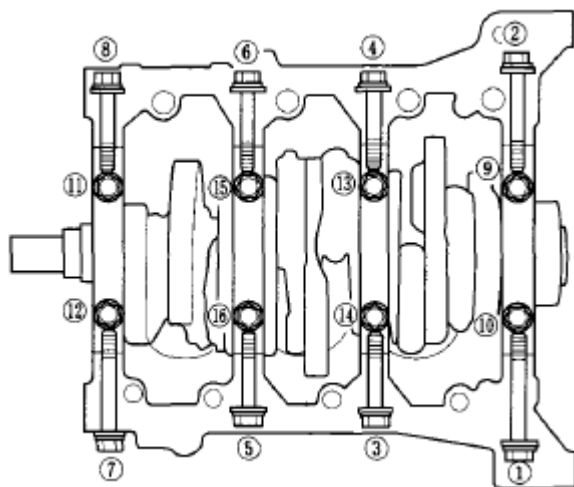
Identifying Bearing Cap Bolts And Bearing Cap Side Bolts
